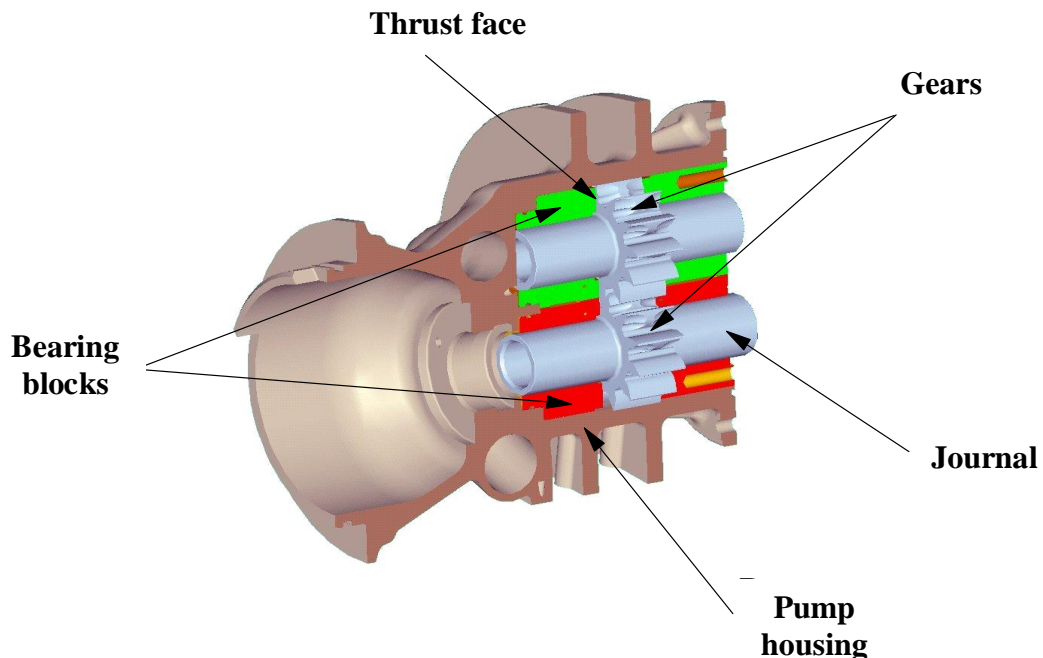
Gear pump thrust bearing in fuel pumps. (Adapted from Goodrich Aero Engine Controls (2009)).
